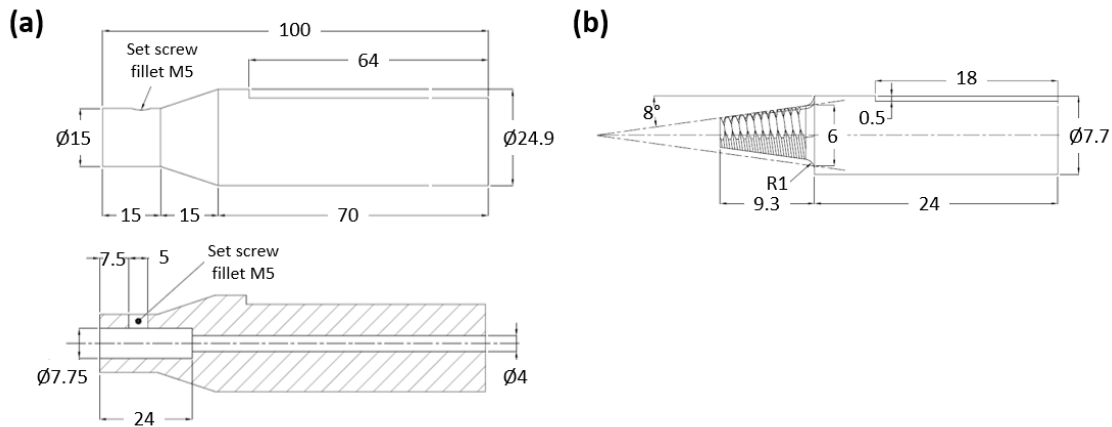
Design of the (a) tool sleeve and (b) pin insert. Dimensions are in millimeters.
